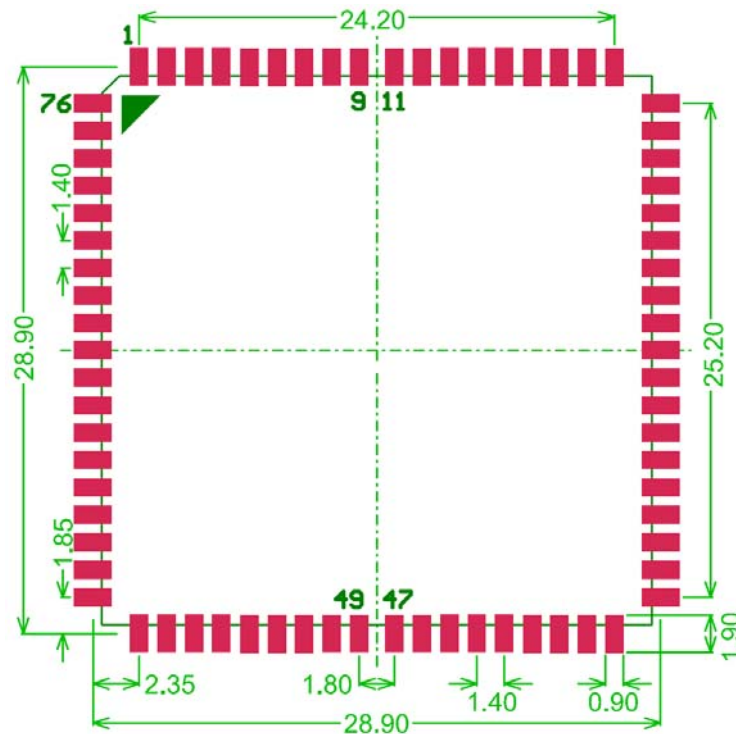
Border Pad Footprint for the Base Board (top view)
